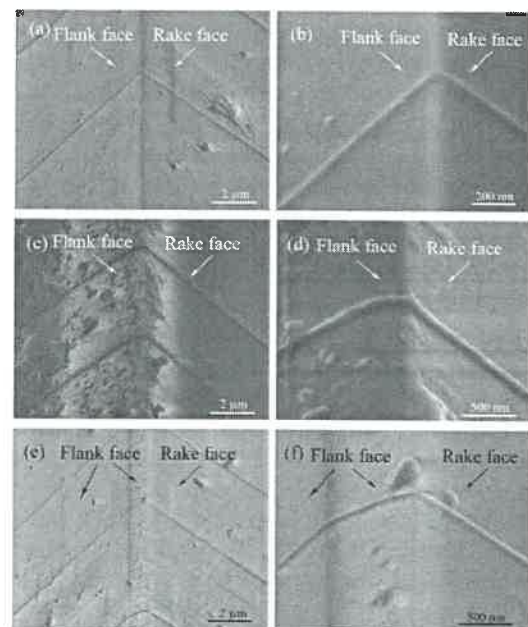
SEM images of diamond cutting tool edge with flat nose. (a), (b) Cutting edge of new diamond tool; (c), (d) Cutting edge of worn diamond tool after cutting 7.5 km of 6061 Al; (e), (f) Cutting edge of worn diamond tool after cutting 15m of 1215 steel. Magnification: 10,000x for (a), (c), (e); 50,000x for (d), (f); 100,000x for (b).
